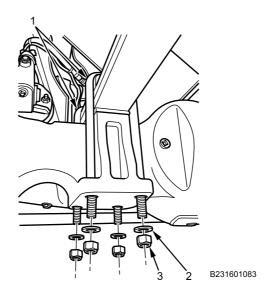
Front Shock Absorber Lower Mounting Bracket Removal, U-Bolts, Locknuts and Washers.
